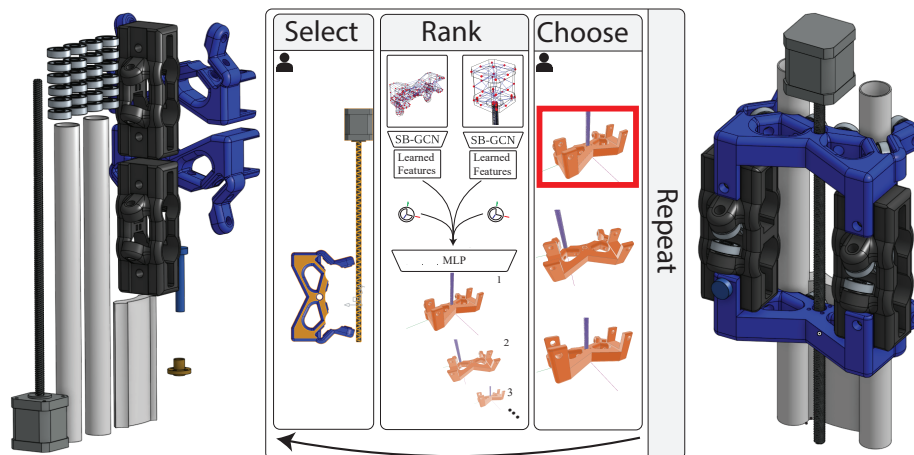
Our tool assists a designer in assembling a collection of CAD parts (left) into a functional assembly (right). First user selects a pair of parts to mate, and indicates roughly where the parts should be mated by where they click on each part. SB-GCN then creates embeddings for each topological entity of the selected parts' B-Reps, which are used as input to a classifier that scores potential mates defined in reference to these topological entities. Our system presents a list of suggestions that the user can pick from. This cycle is repeated until a working mechanical assembly is realized.
